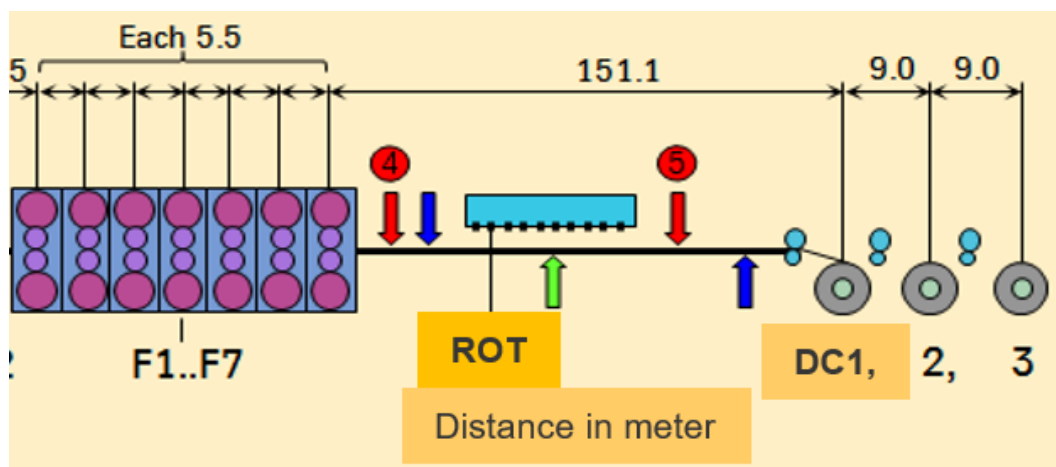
AMNS Calvert Finishing Hot Strip Mill layout (ROT: Run Out Table, DC: Down-coiler)
